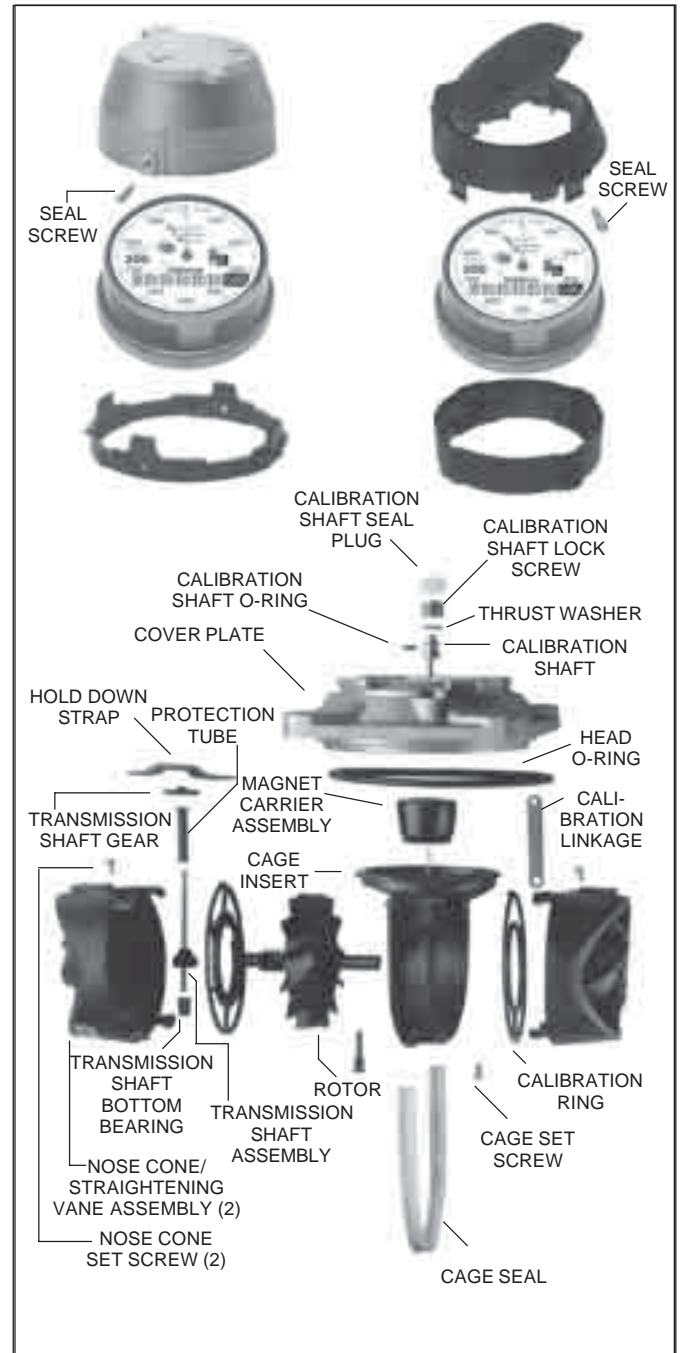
Register and Measuring Element Assembly, 1 1/2" - 4"
